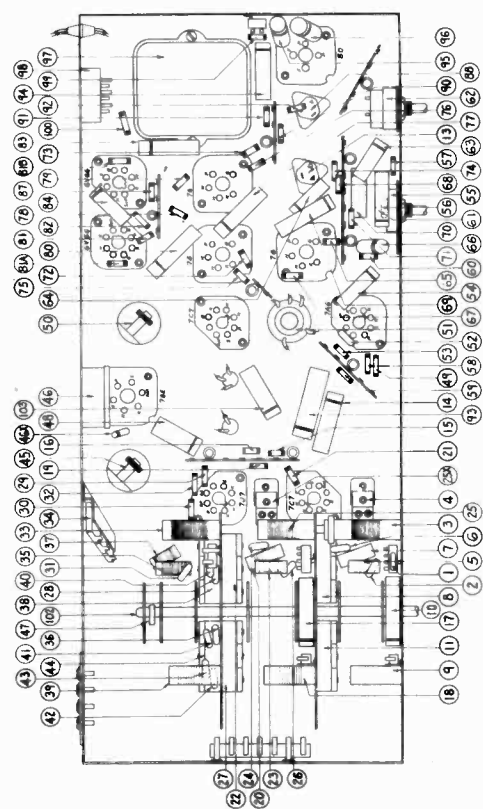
PART LOCATIONS, UNDERSIDE OF CHASSIS
